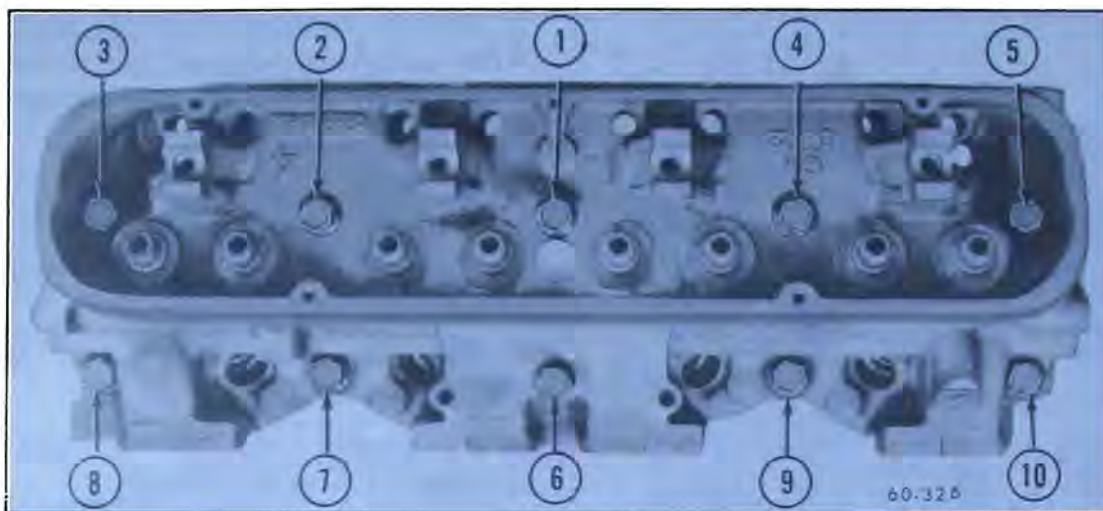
Cylinder Head Bolt Tightening Sequence
